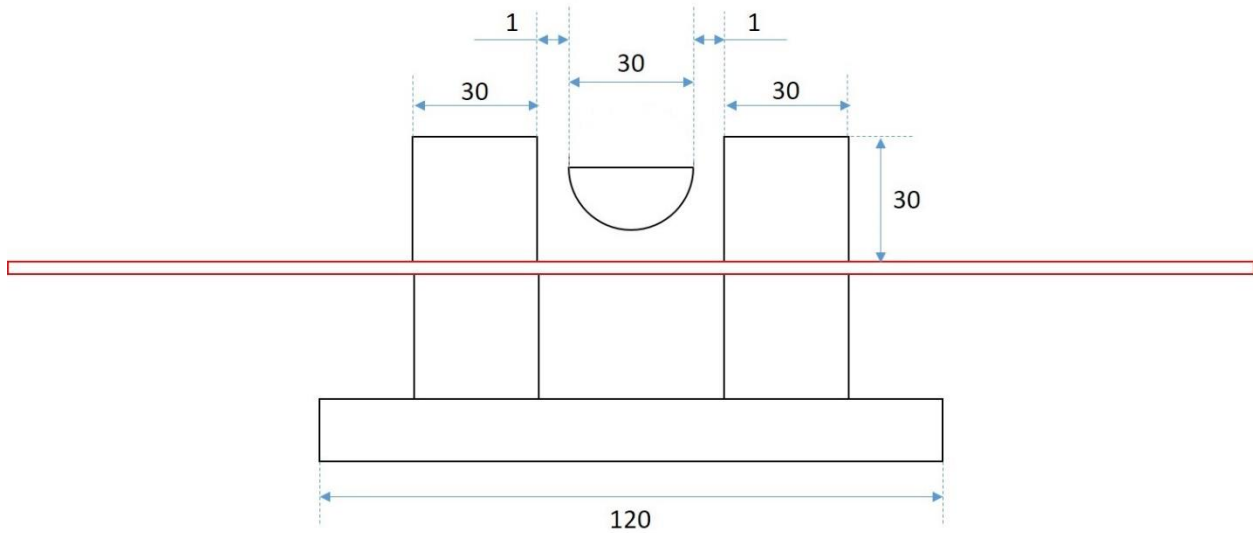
Dimensions of the stamping setup (All dimensions in mm. Not to scale)
